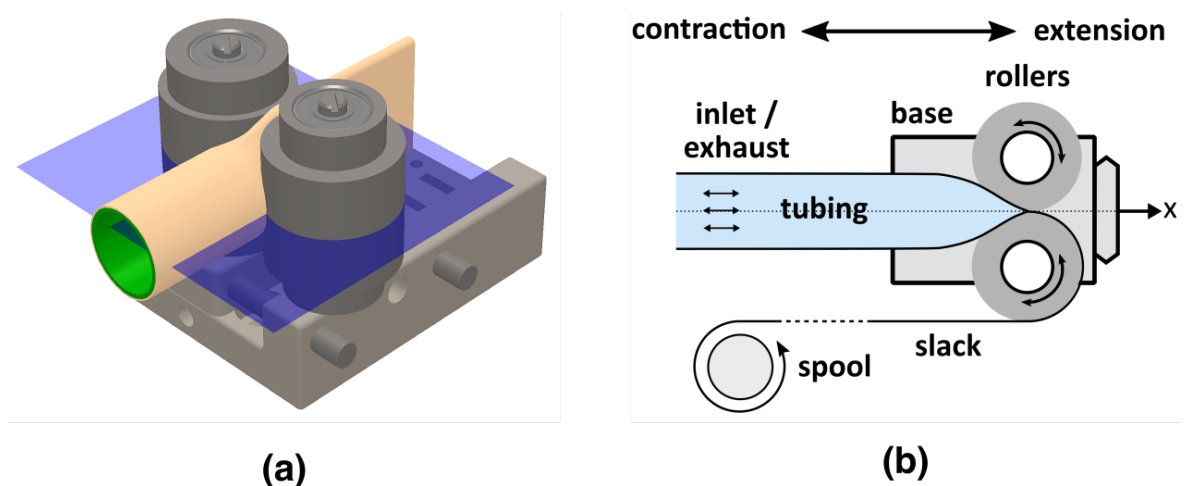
(a) CAD drawing of the pinch-roller drive. (b) Section view drawing of the actuator [46].
